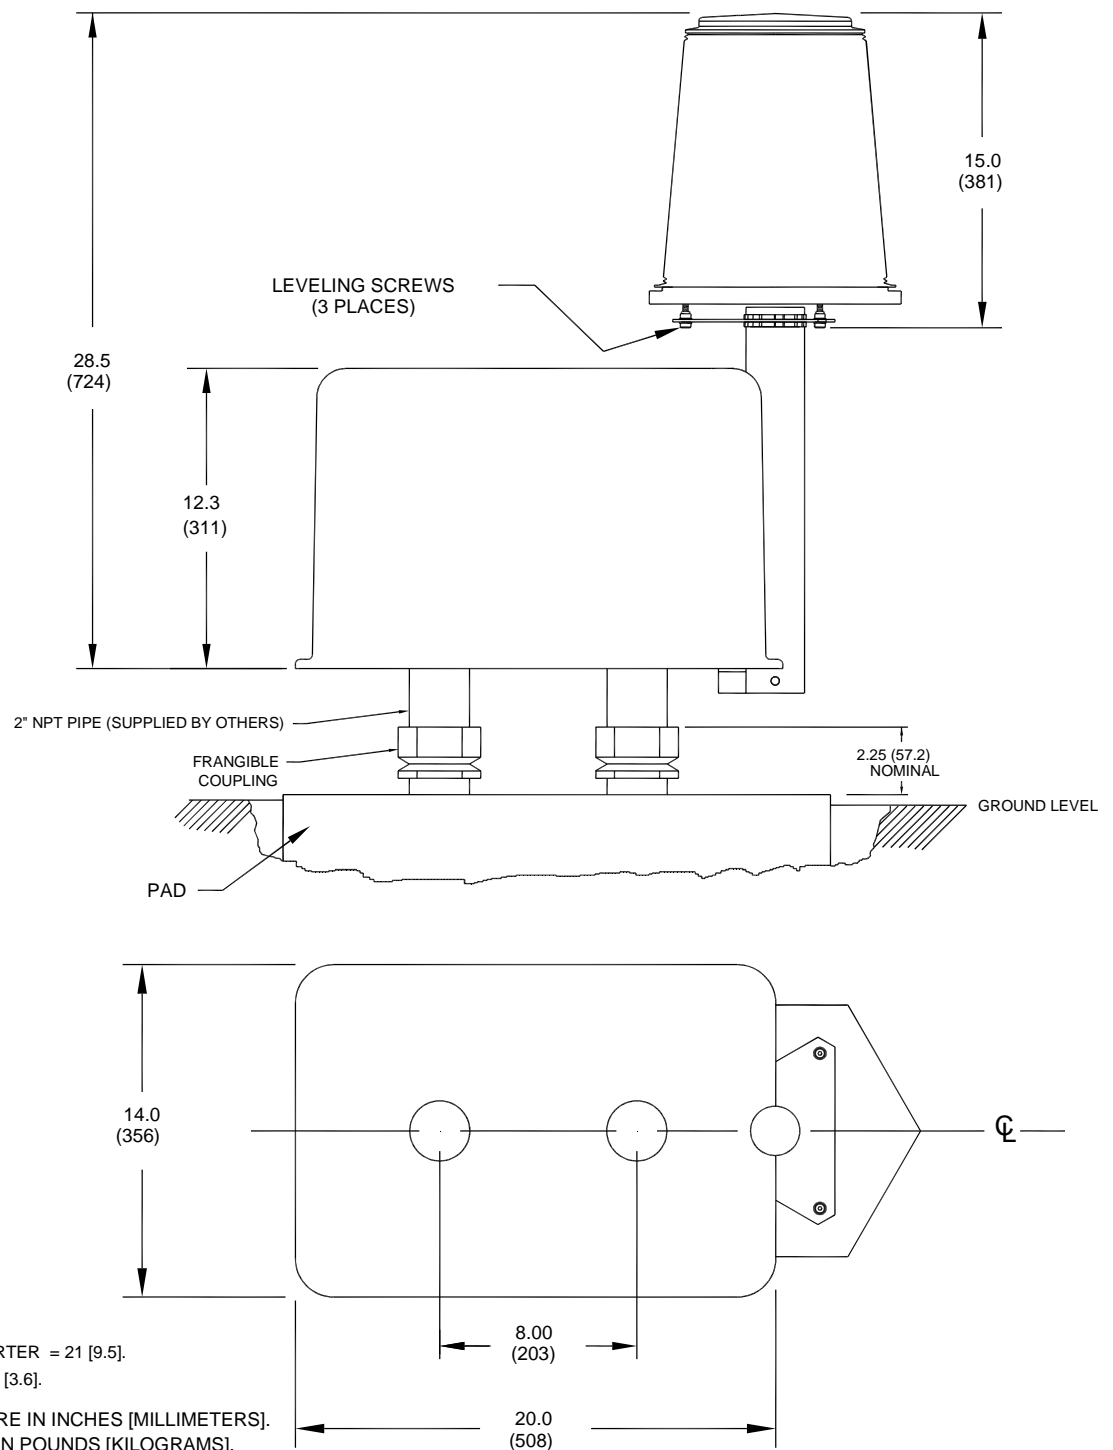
PC 400 and FH 400 Comounted Unit Mounting and Outline
